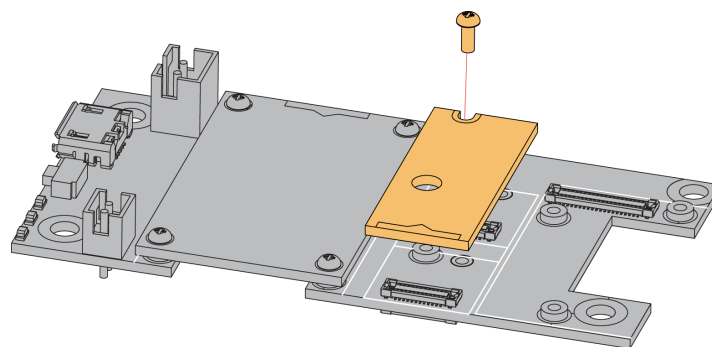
RAK1910 WisBlock GNSS Location Module Mounting
